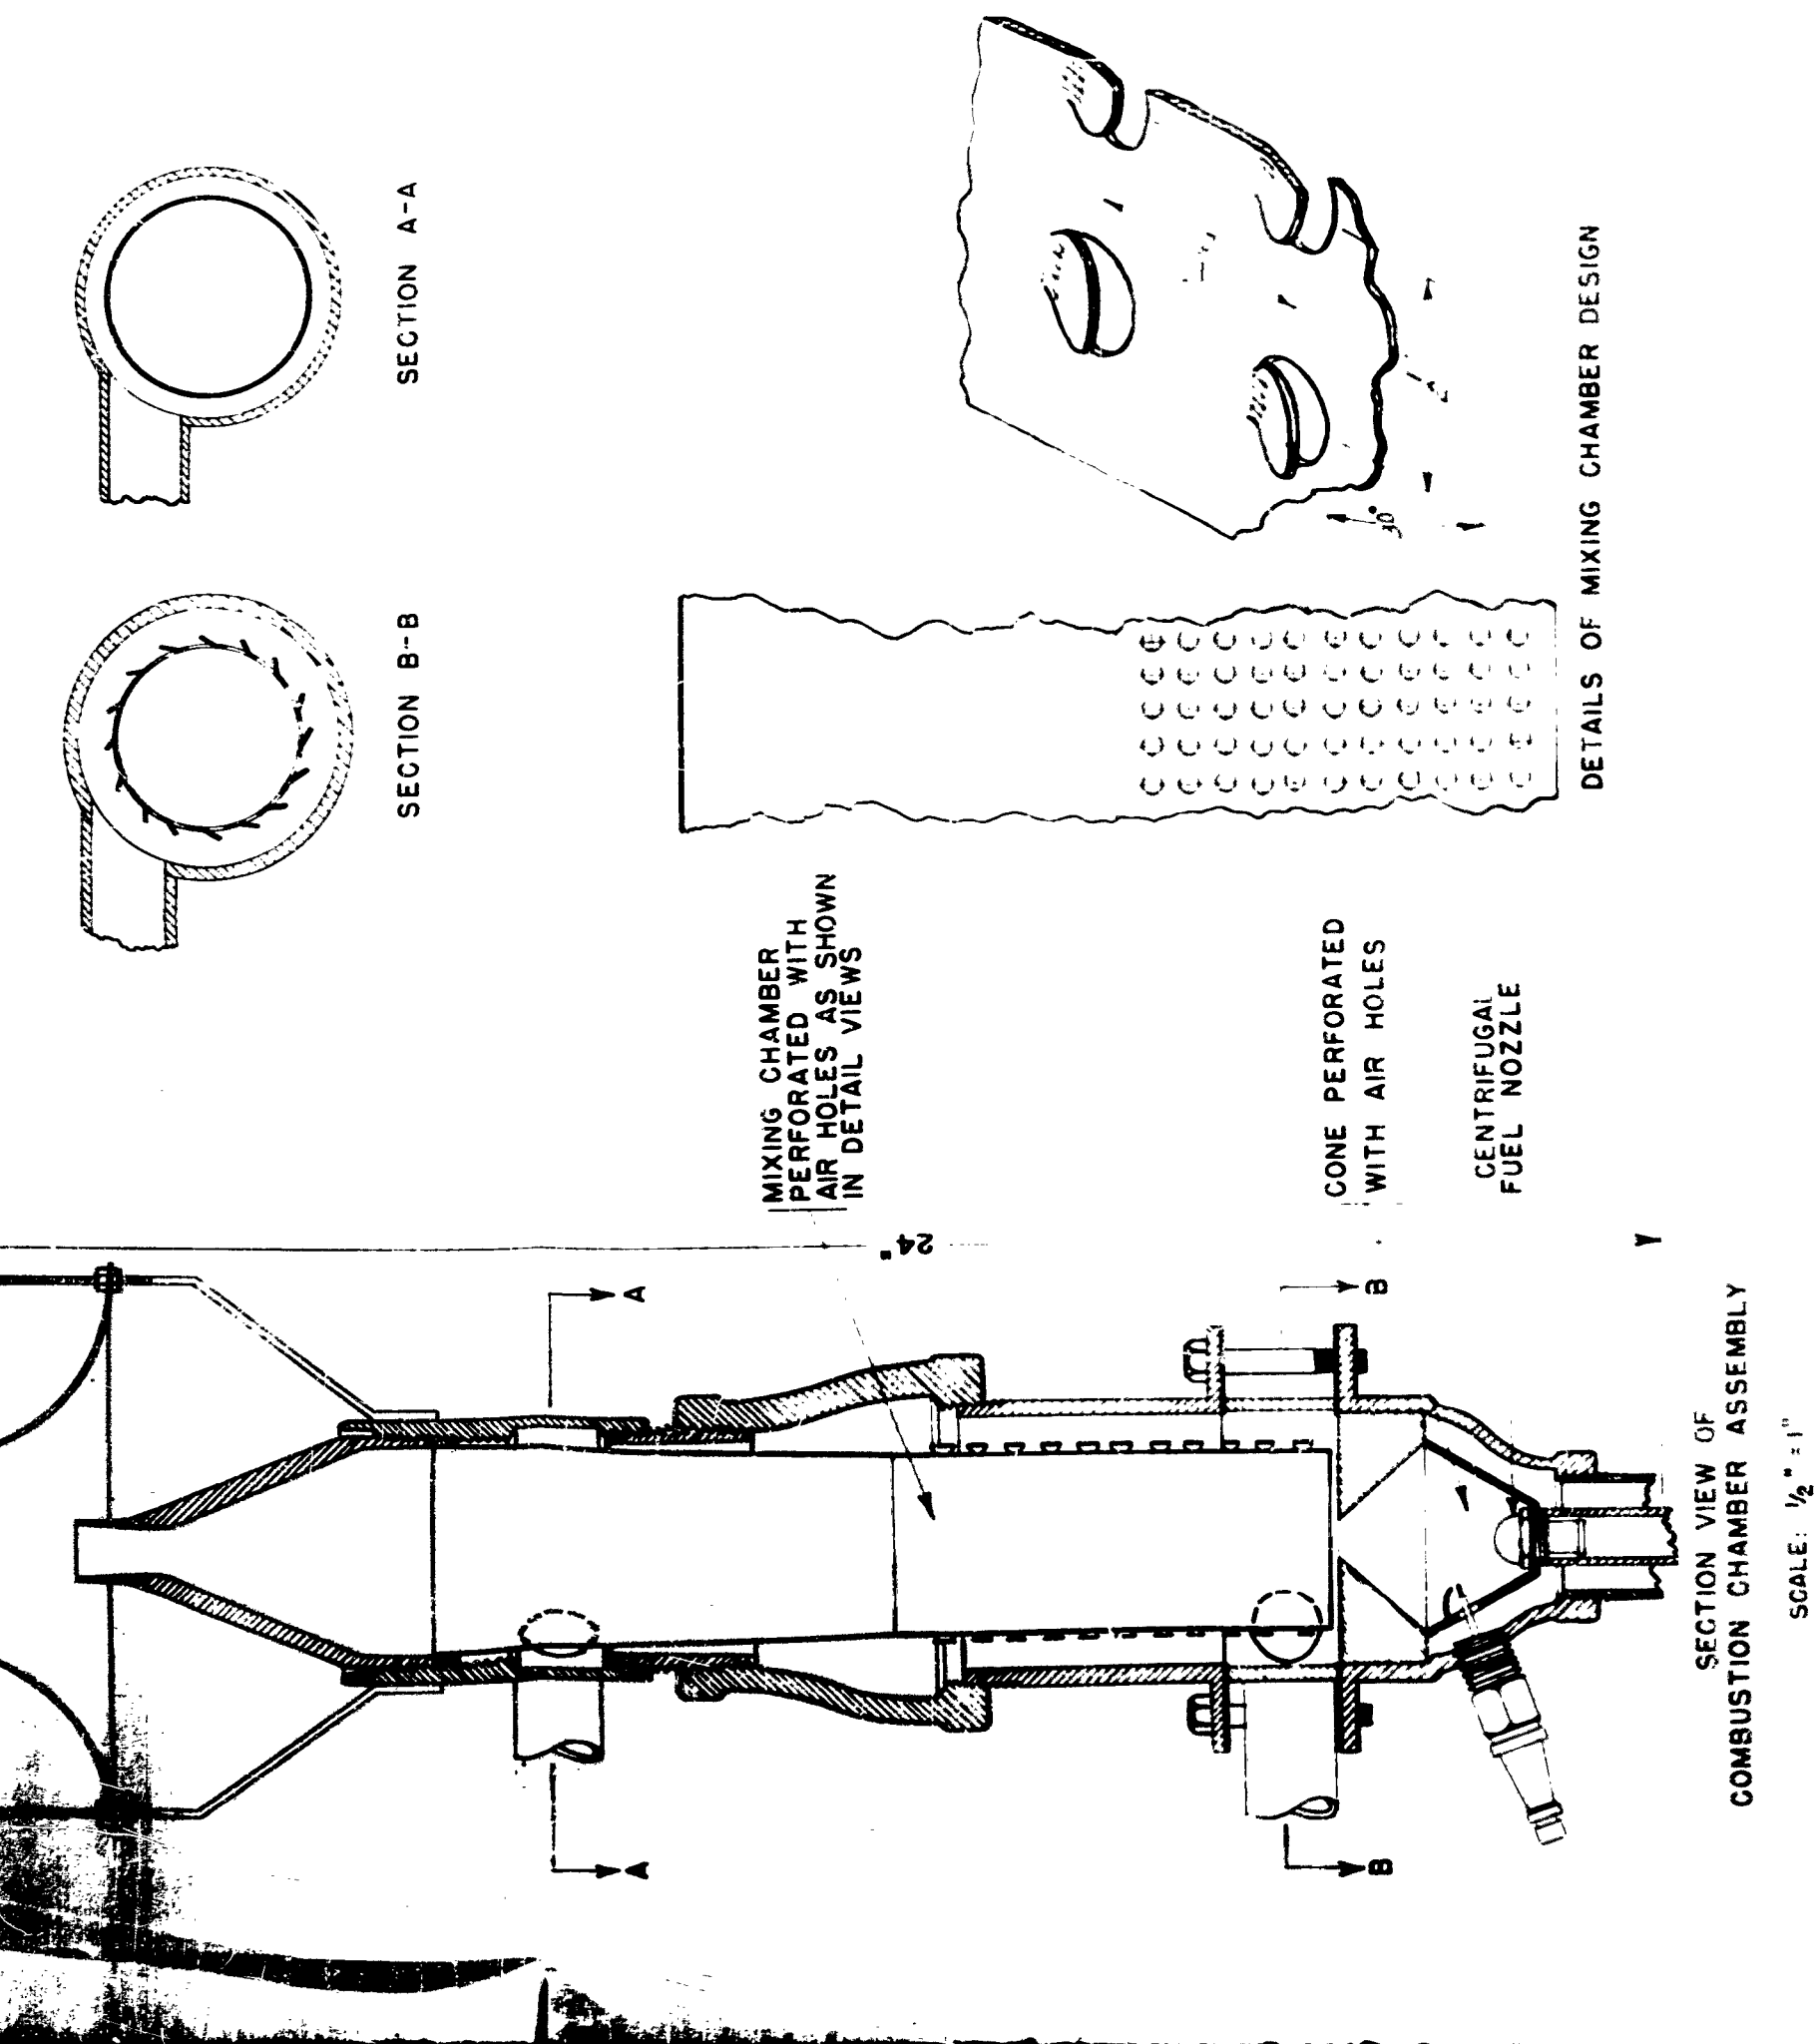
SECTION AND DETAIL VIEWS OF COMBUSTION CHAMBER NO. 5
